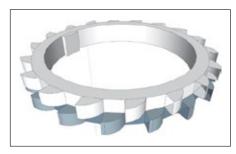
Double left-hand hydraulic turbine Rysunek 6. Podwójna turbina obracająca się przeciwnie do ruchu wskazówek zegara
